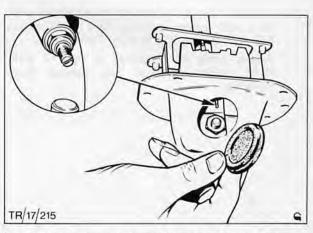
Remove grommet from selector lever housing (insert shows locknut on operating cable)
